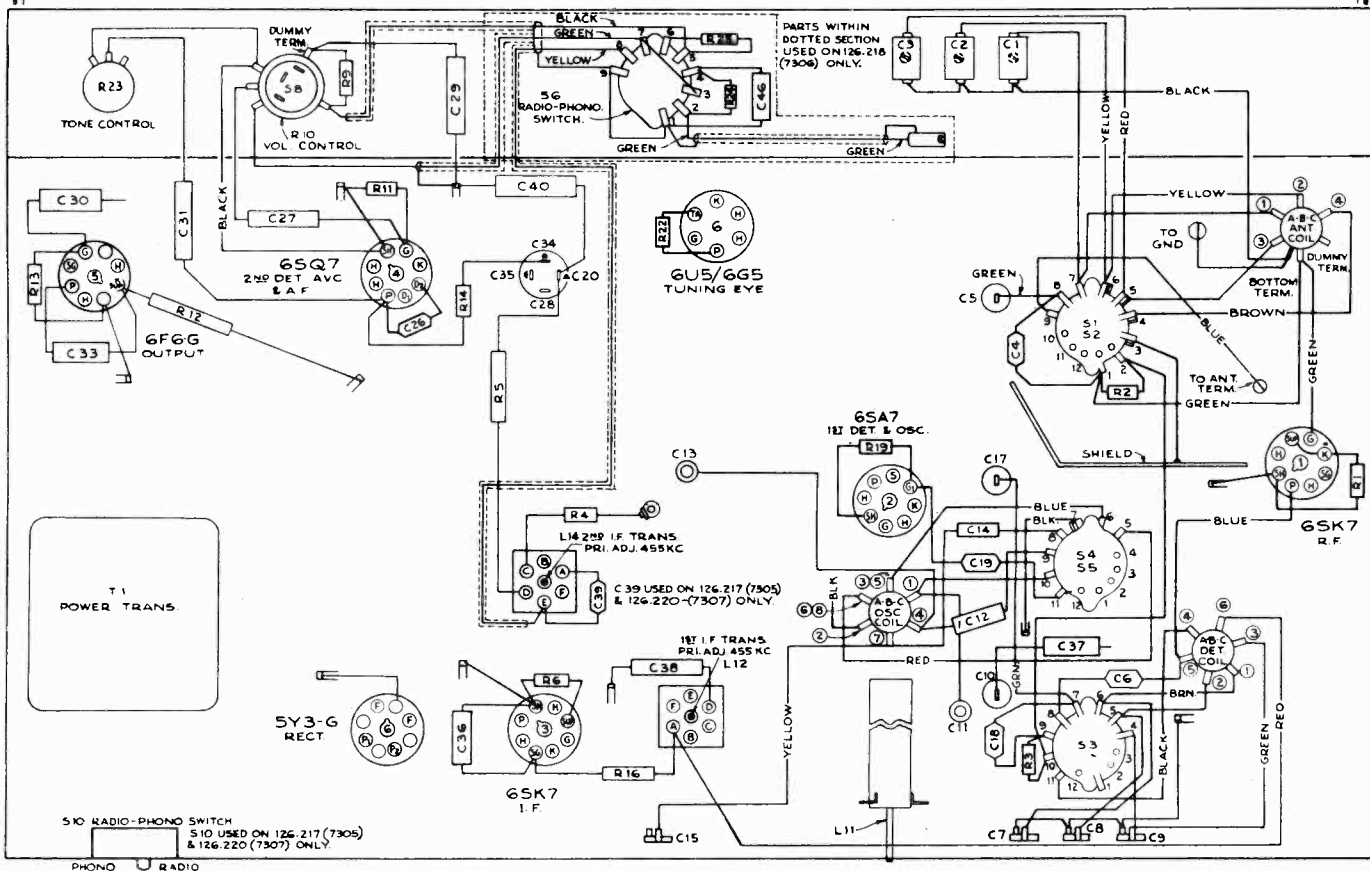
TUBE, TRIMMER AND PARTS LOCATION—BOTTOM VIEW
